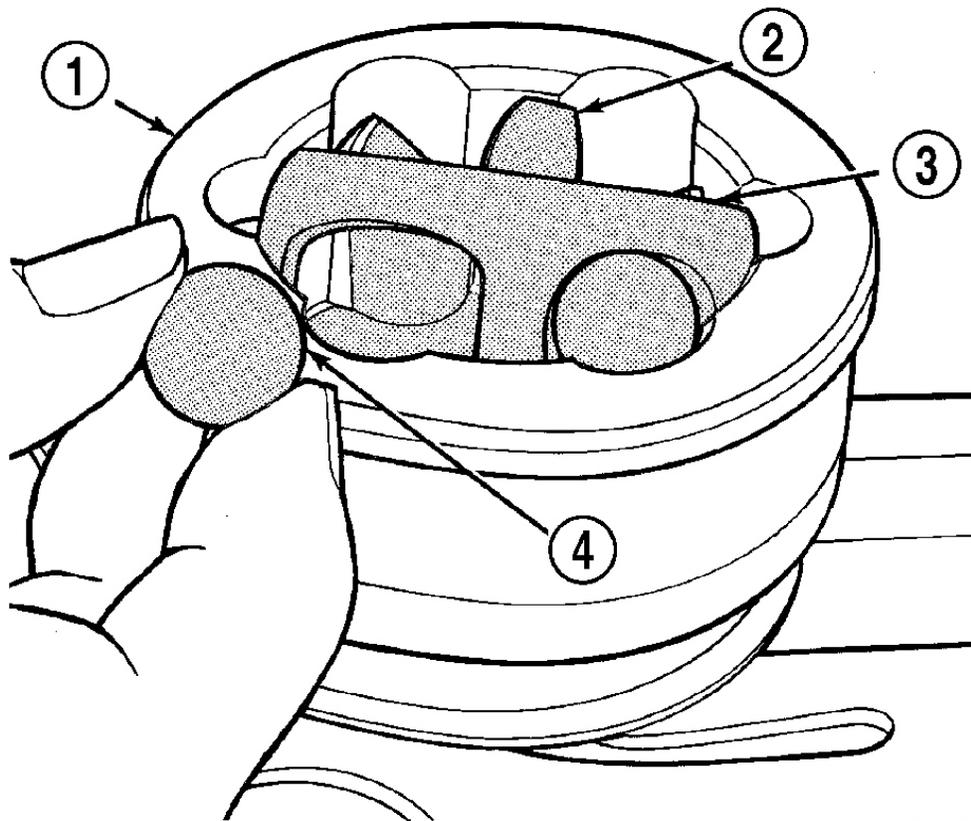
Marking Alignment Marks On Inner Race/Hub, Bearing Cage And Housing With Dabs Of Paint
